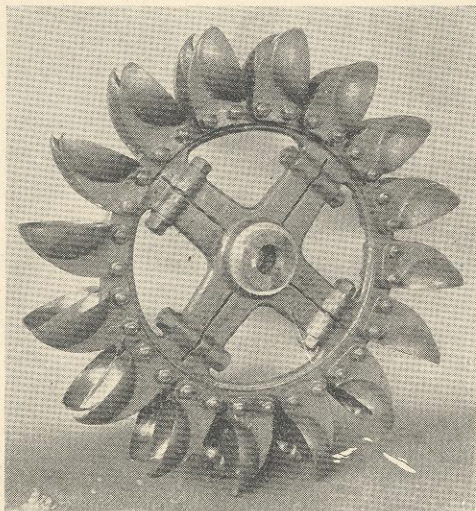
RUNNER EQUIPPED WITH DOUBLE-LUG BUCKETS
